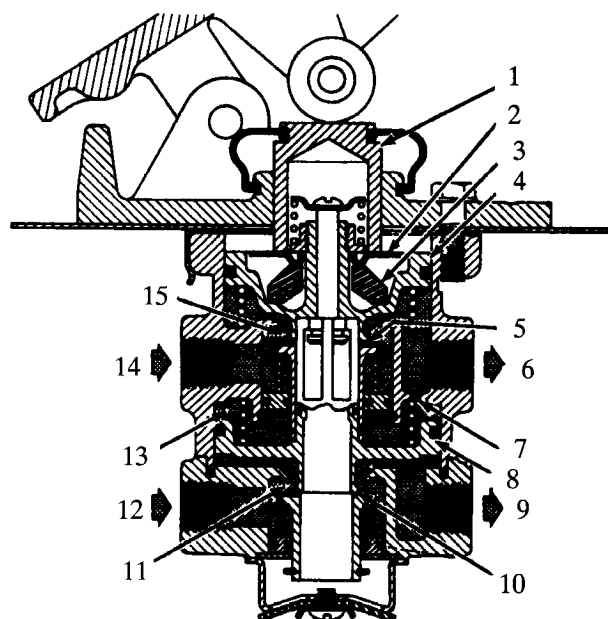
Treadle Type Brake Valve - Pedal Depressed
